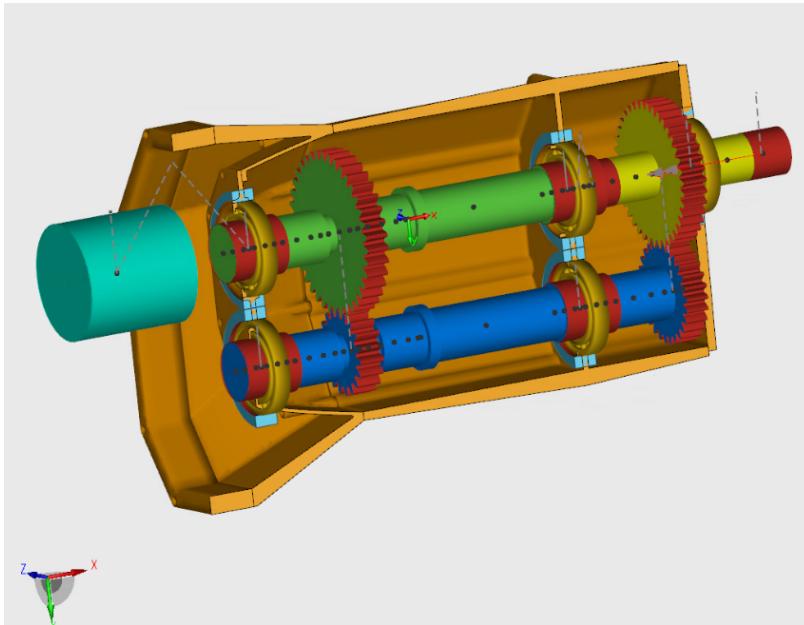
The model of a simple gearbox with three elastic gear shafts: input shaft (green), layshaft (blue), output shaft (yellow) supported by ball bearings in a rigid housing and connected by cylindrical gears
